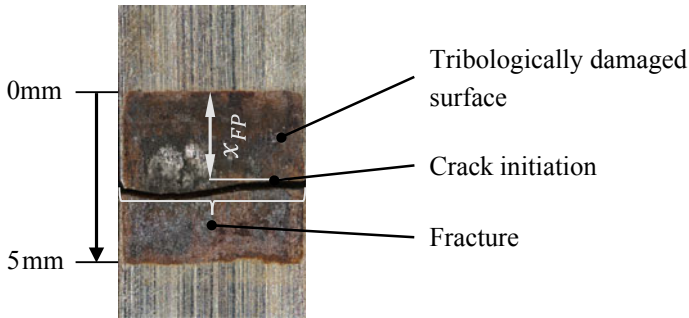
Fretting scars on a tensile specimen and definition of the location of failure
